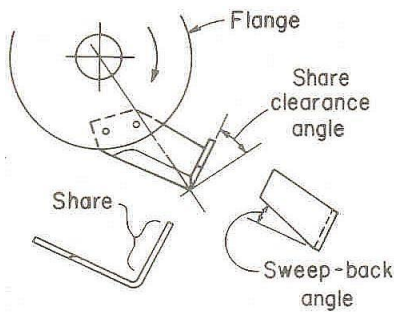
Three views of an L-shaped blade for rotary tiller [11]
